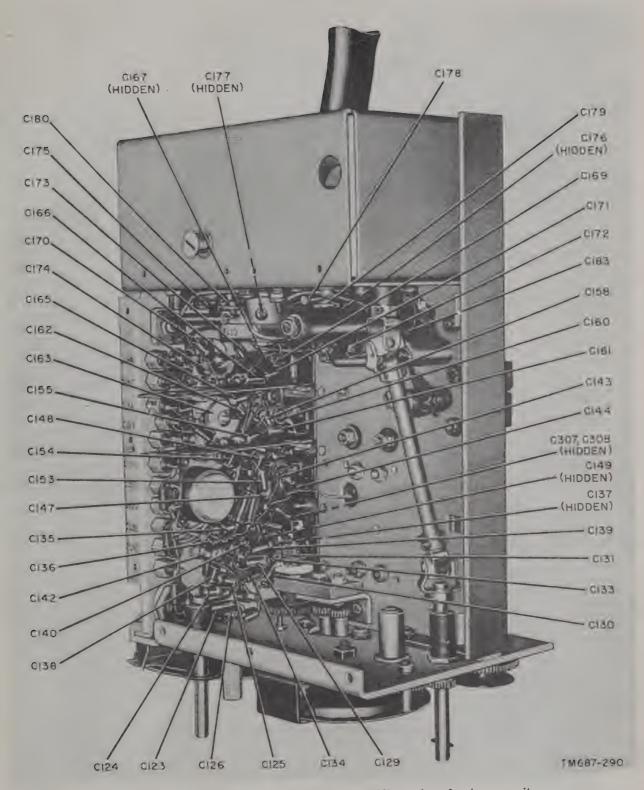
Rf exciter plug-in assembly, right-oblique view showing capacitors.
